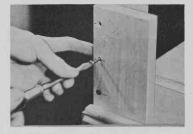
Driving a 1 3/4 in. No. 9 - F.H.B. screw with a 4 in, screwdriver,
